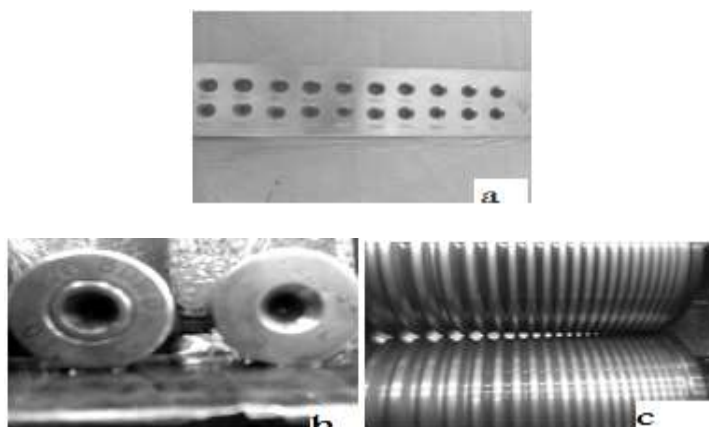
a- Drawing bench b- Drawing pieces, and c- Rolling machine.
